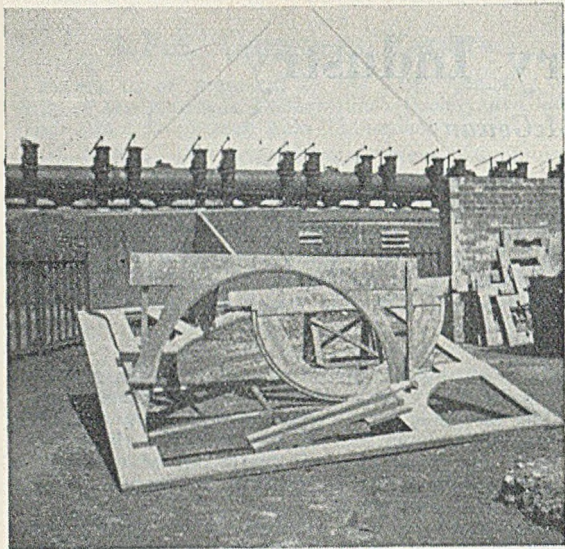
PATTERN EQUIPMENT FOR THE 60-IN. DIAM., 90 DEG. FOOT BEND PIPE CASTING—A JIG-SAW OF "BITS AND PIECES."
